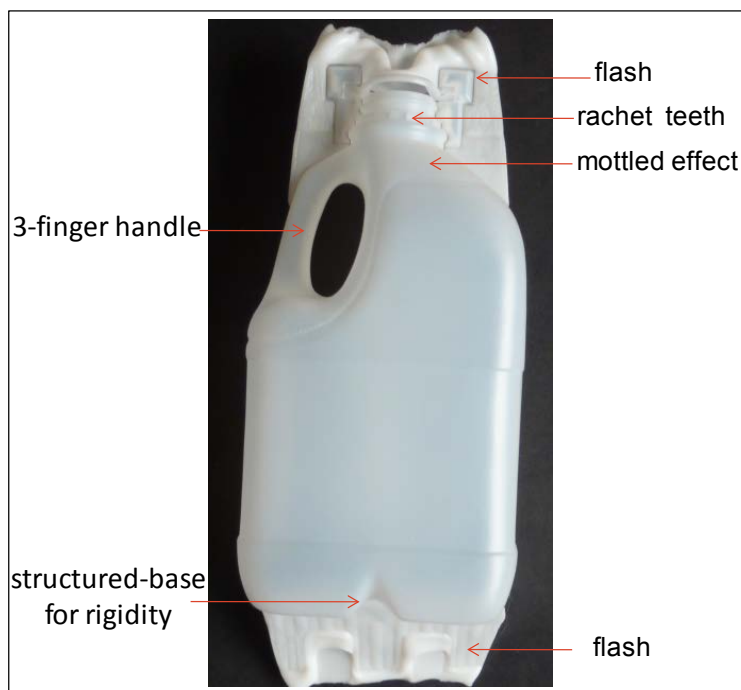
Photograph of milk-bottle moulding as it comes out of mould
